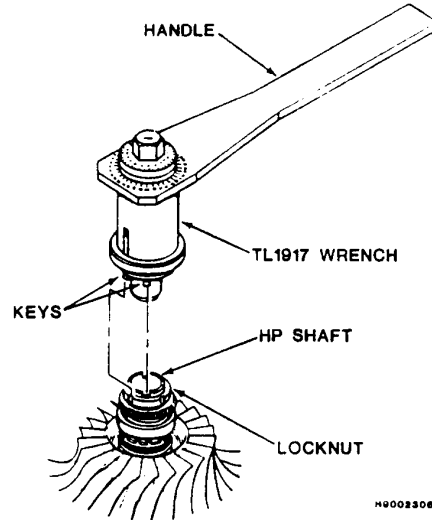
Torquing HP Spool Locknut Using TL1917 HP Shaft Wrench
